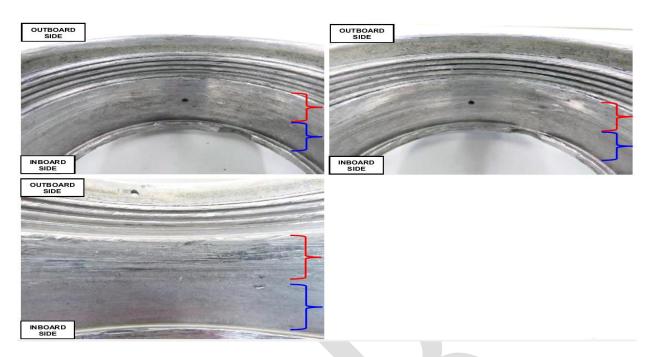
Details of the support bearing sleeve assembly inner surface after cleaning. The threads and the duplex bearing seat completely lost the yellowish color of the chromate conversion treatment required by the drawing. The inboard bearing seat (blue parentheses) shows no significant damages, while the outboard bearing seat (red parentheses) is characterized by a multitude of circumferential marks and deep inclined nicks. The nicks are also visible on the thread. These marks and nicks are showed in detail in Fig. 30.
